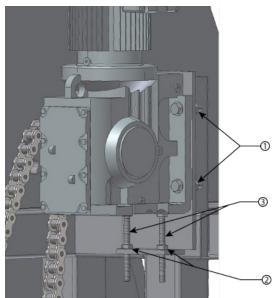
Gearbox, filter with stand A. Nuts (4) B. Lock nuts (4) C. Adjustment screws (2)
